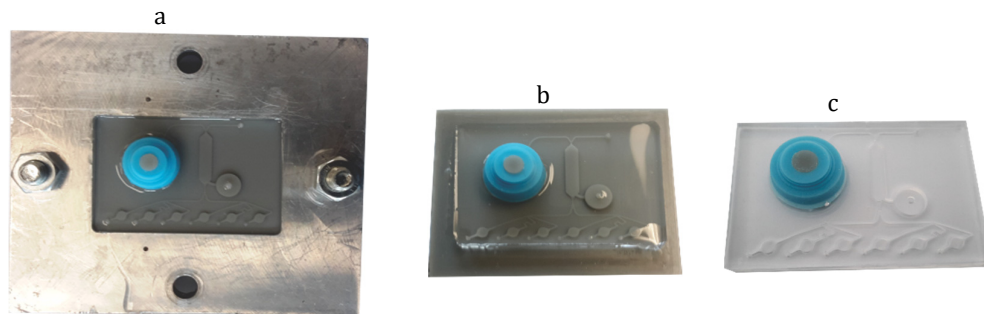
(a) Fluid filled Blister with positive mould chip is installed in a metal jig and filled with liquid PDMS. (b) Cured PDMS negative mould and blister still attached to positive chip. (c) Bonded glass slide with PDMS mould bearing a blister.
